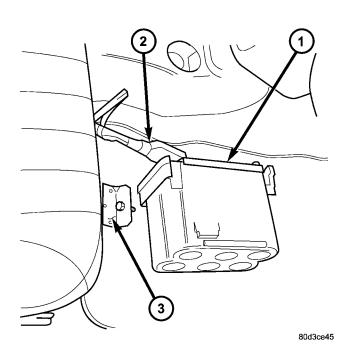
Spiral Plate Battery - Diesel Engine Only
